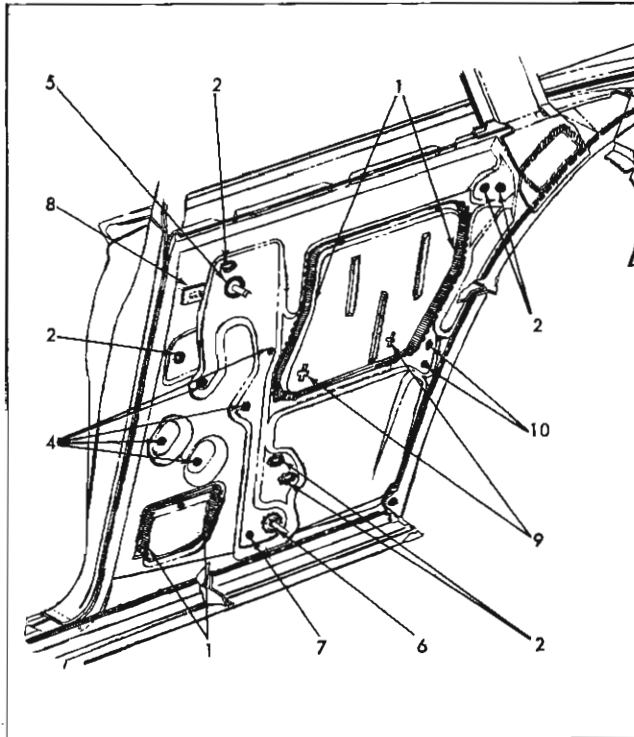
Inner Panel Sealing - 11 Style Electric
